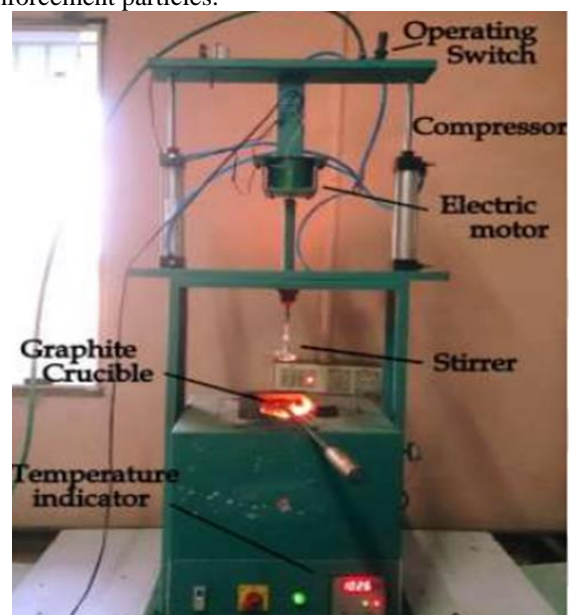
Stir Casting setup for fabrication of (Al8011/ B₄C/ Al₂O₃)
